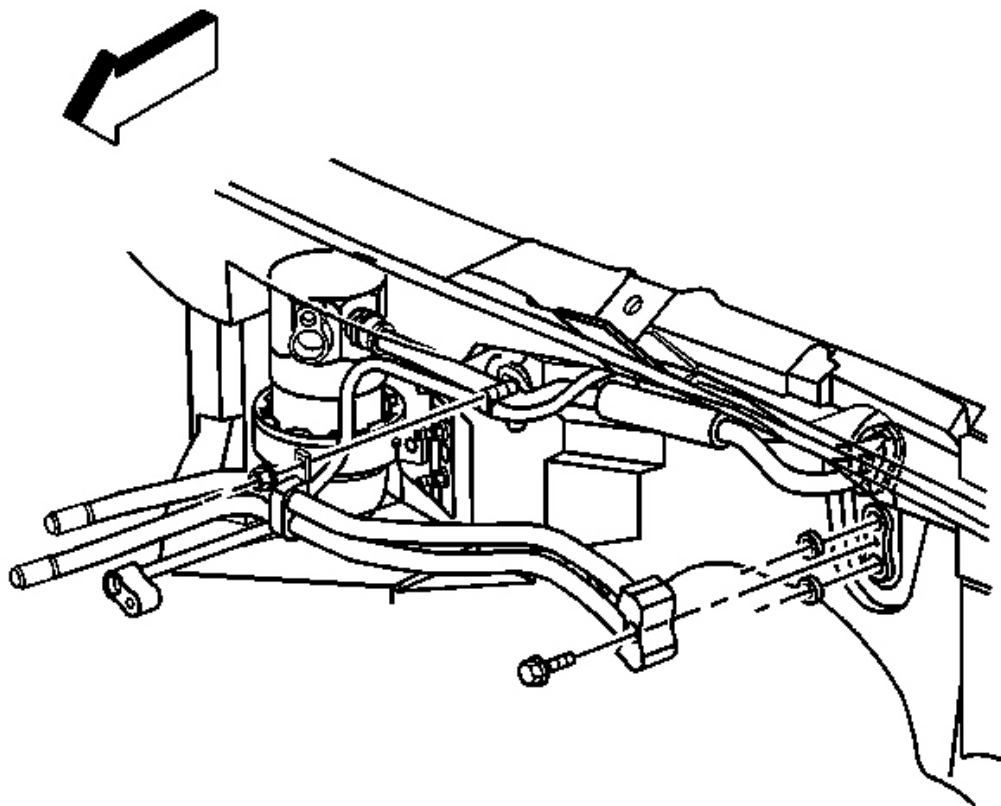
Heater Core, Retaining Bolt & Heater Pipe
